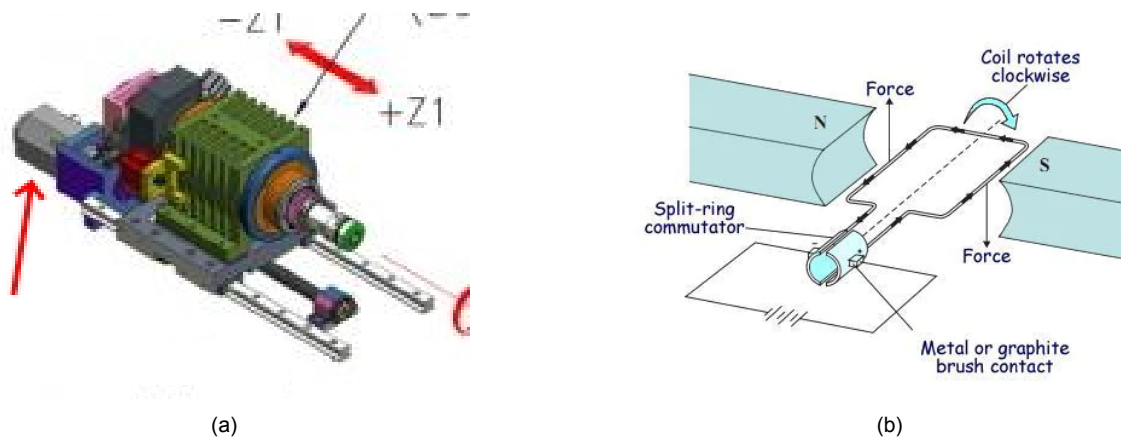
(a) The motor which actuates the linear movement of the main spindle axis (b) A 2-pole brushed motor operation [23].
